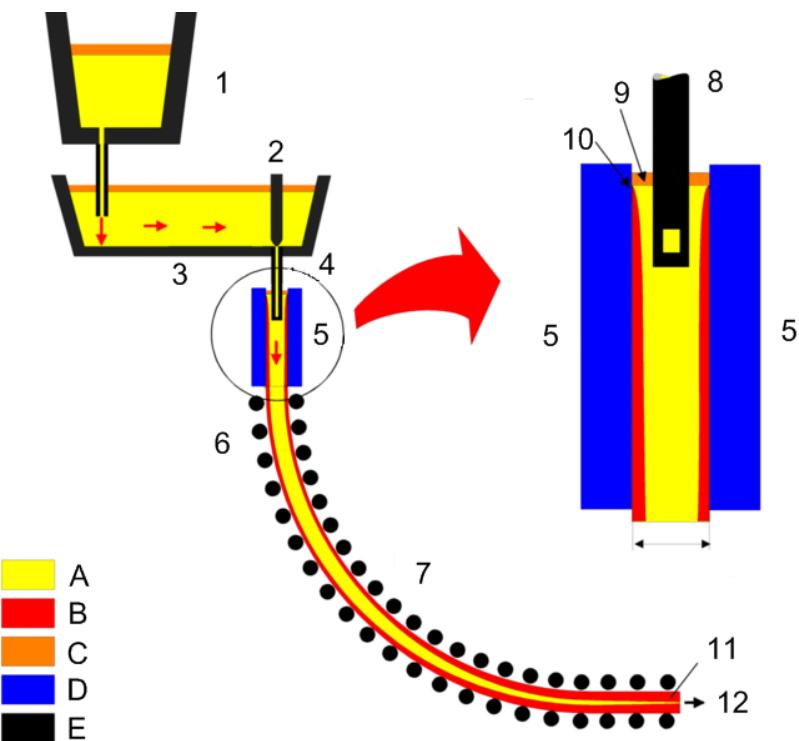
Illustration of continuous casting. The parts are ladle (1), stopper (2), tundish (3), shroud (4), mold (5), roll support (6), bow zone (7), shroud (8), bath level (9), meniscus (10), withdrawal unit (11) and finished steel (12). The colors denote liquid metal (A), solidified metal (B), slag (C), water-cooled copper plates (D) and refractory material (E) (Javurek, 2008).
